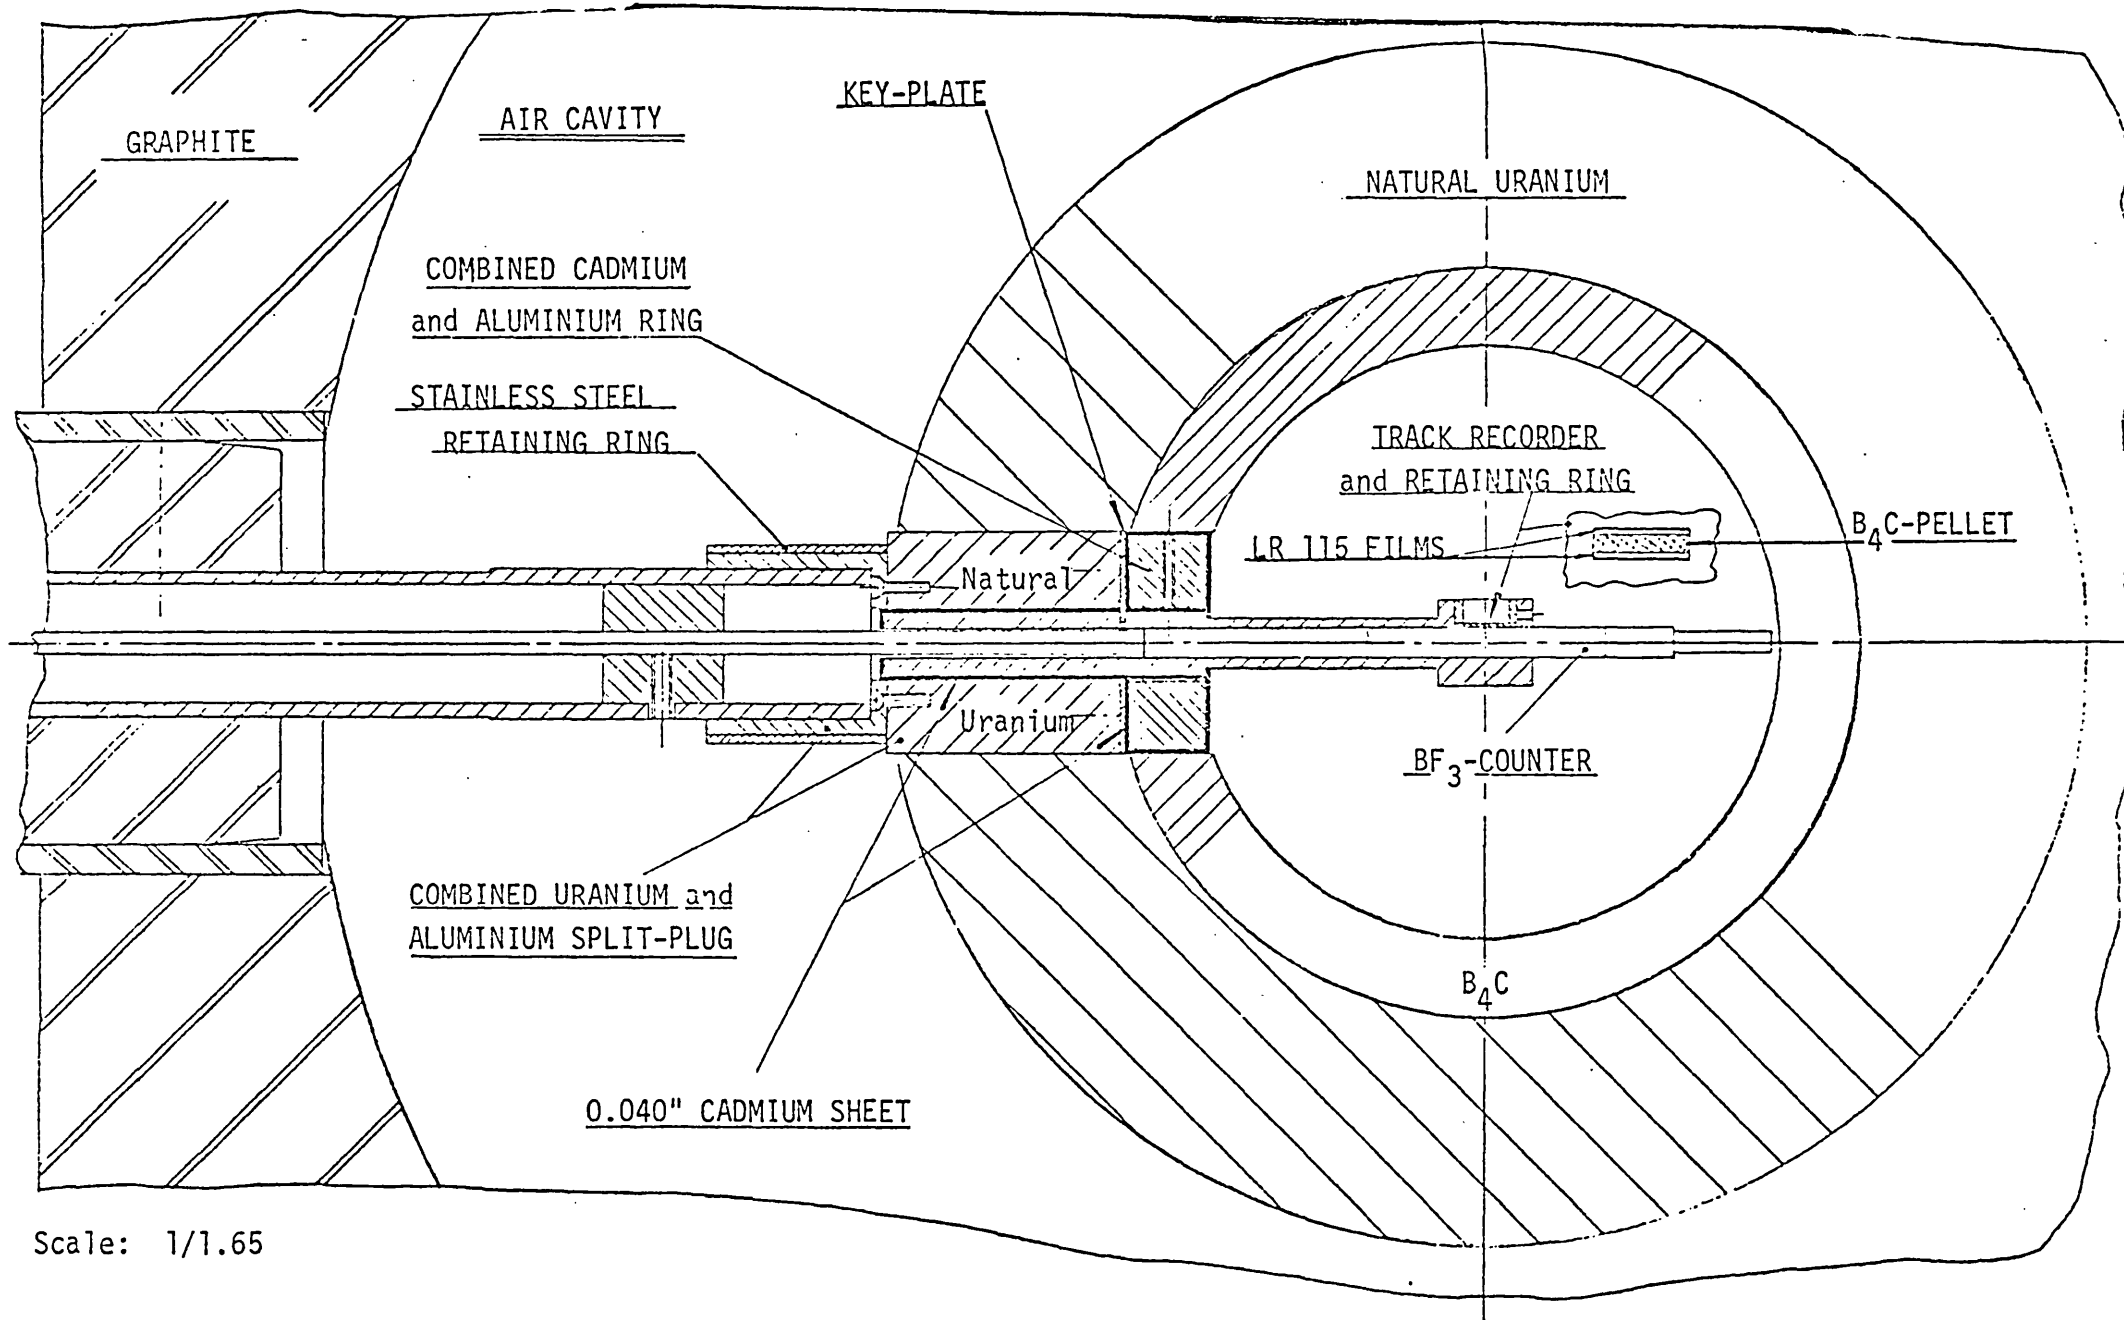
Cross-sectional side elevation on the thermal column extension
